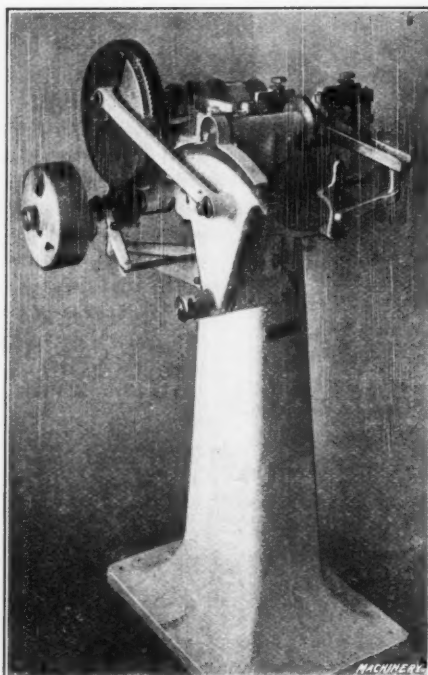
A Spring Winding Machine which receives Wire from the Coil and completes Springs at the Rate of 150 per Minute
